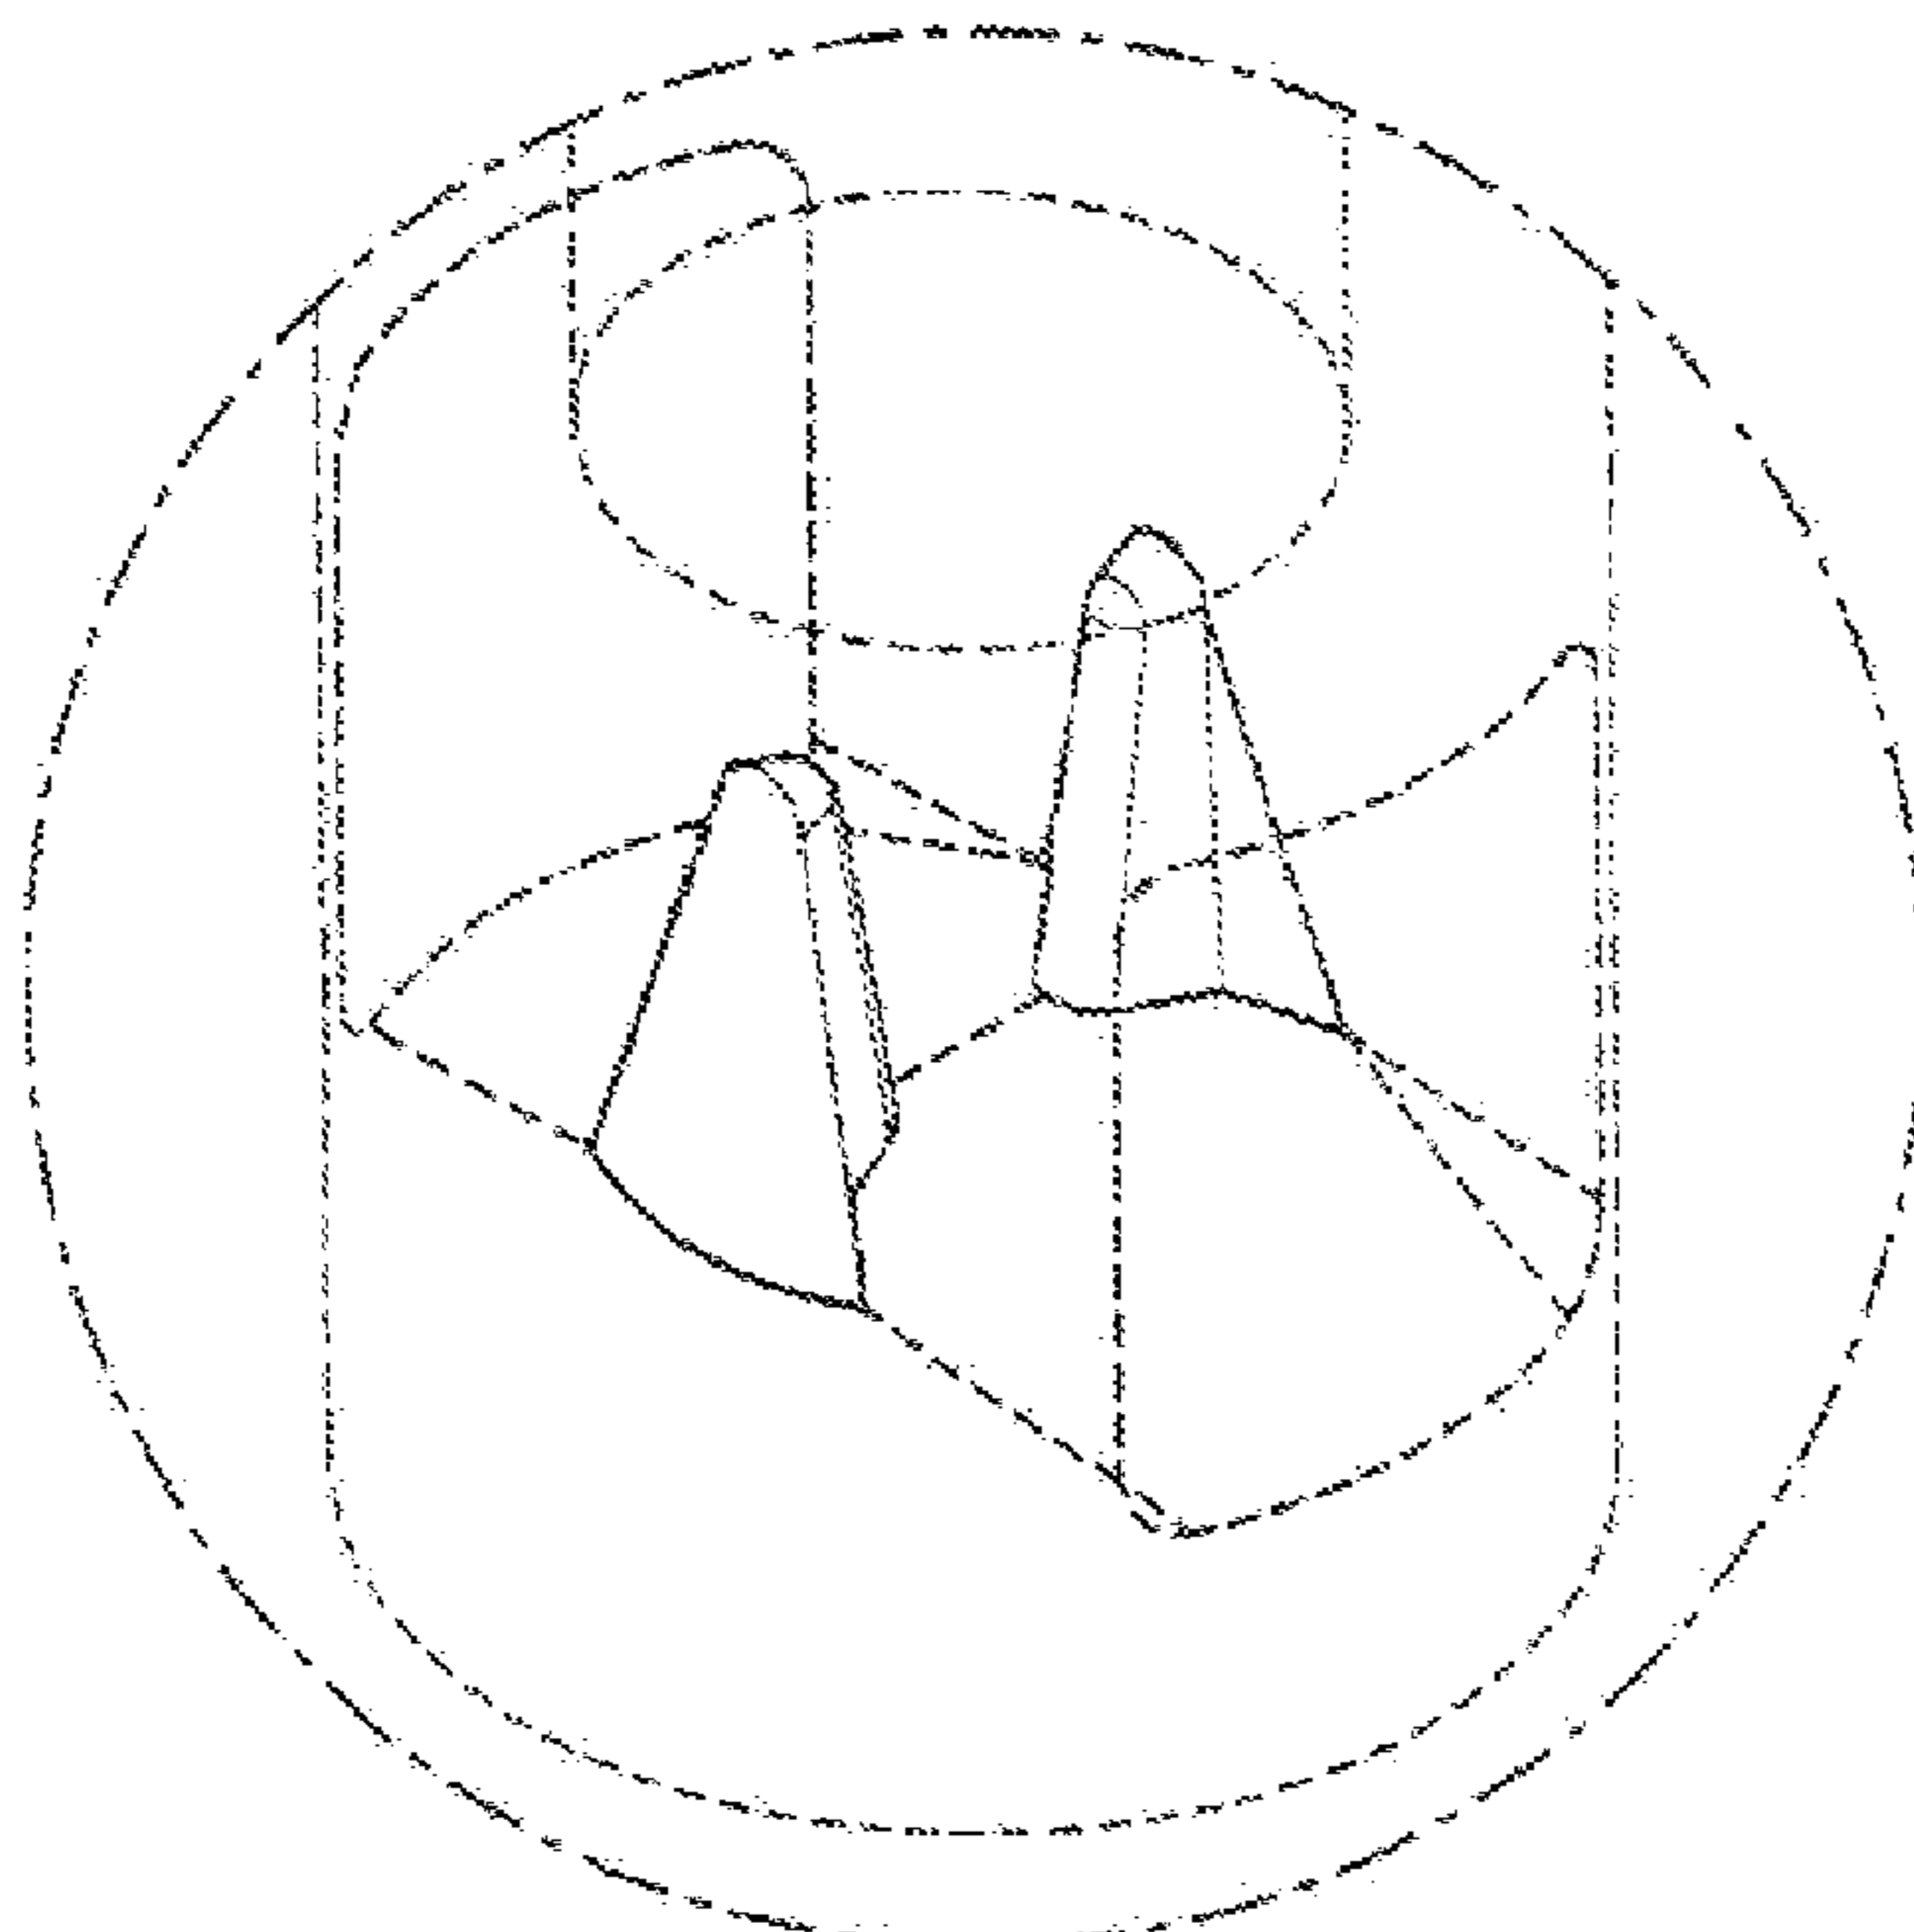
is an enlarged detailed perspective view of the casting nozzle shown in circle 3 in FIG. 5;
